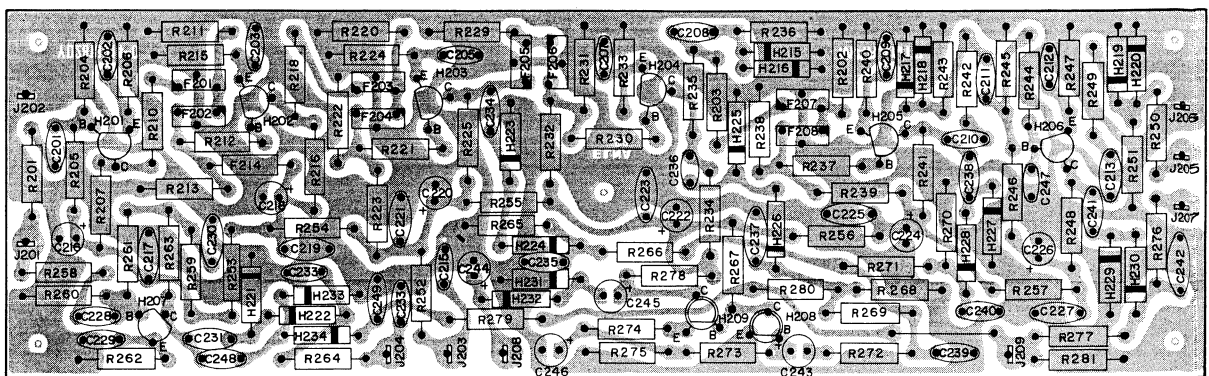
FM IF Amplifier Assembly P200 Component Locations
